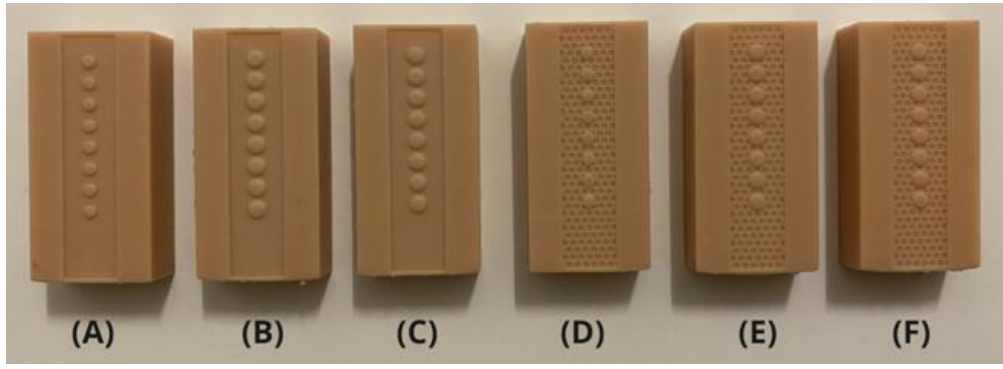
Image of the mould B types for the different footprint designs; (A) base footprint, (B) base footprint with enlarged suction holes, (C) base footprint with enlarged suction holes and radial ridges, (D) hexagon micro-patterned footprint, (E) hexagon micro-patterned footprint with enlarged suction holes, and (F) hexagon micro-patterned footprint with enlarged suction holes and radial ridges.
